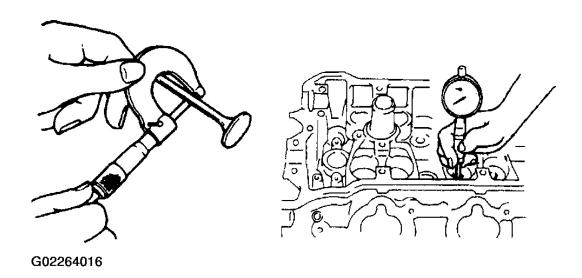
Measuring Valve Stems & Guides Courtesy of SUZUKI OF AMERICA CORP.
